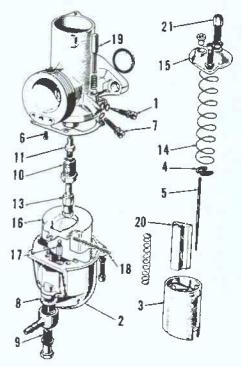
Exploded view of Amal carburetor with concentric float chamber.
